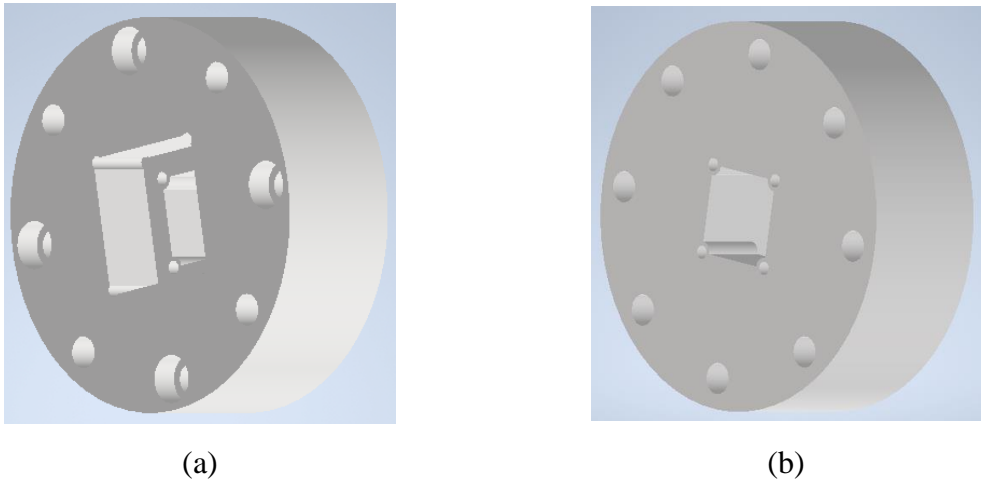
(a) Bottom of the top piece; (b) Top of the top piece.
